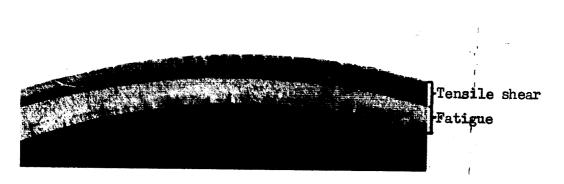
A portion of the fracture in the torque cylinder shown in figure 3. The remainder of the fracture was similar in appearance. X 3.
